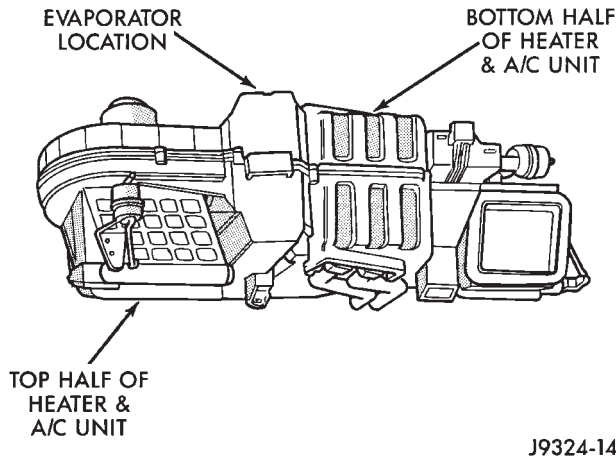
Evaporator Coil Location in Heater-A/C Housing (Upside Down)
